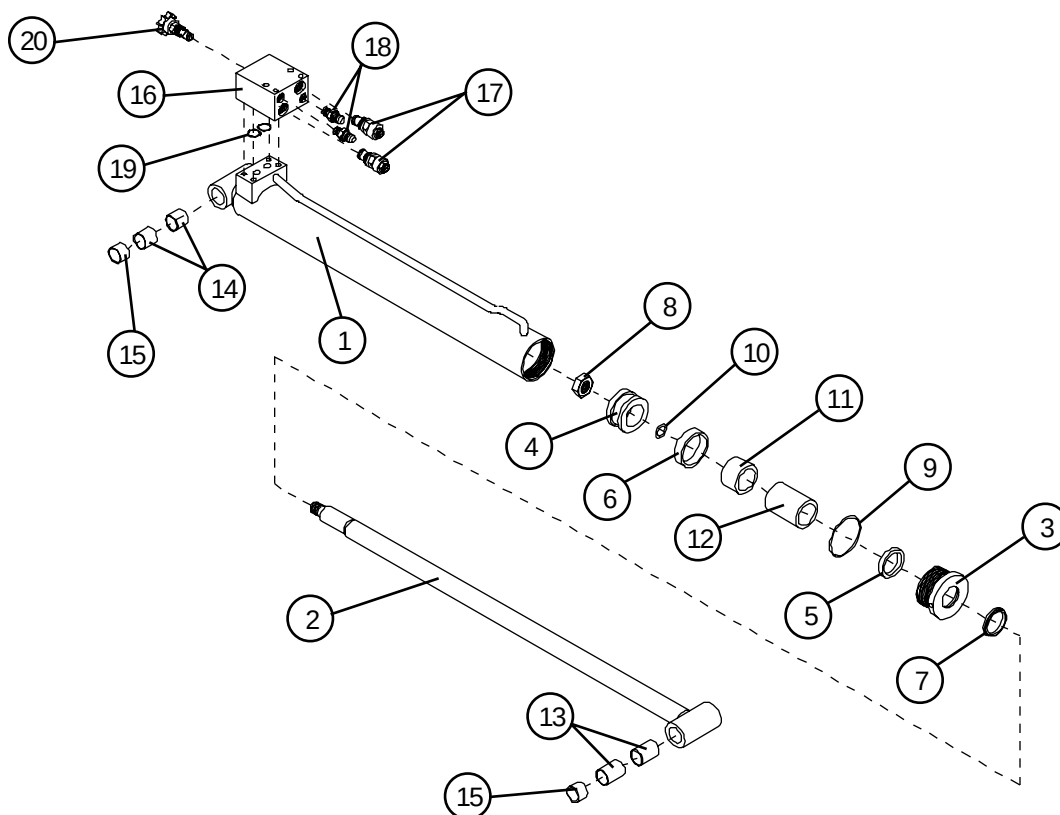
PLATFORM LEVELING SLAVE CYLINDER ASSEMBLY
